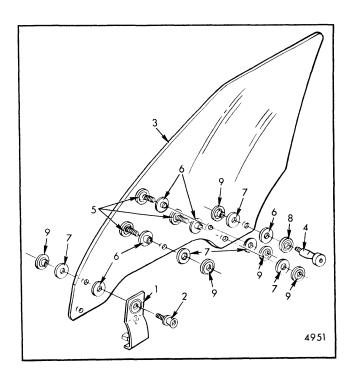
Front Door Window Assembly - "A-29,35" Styles
